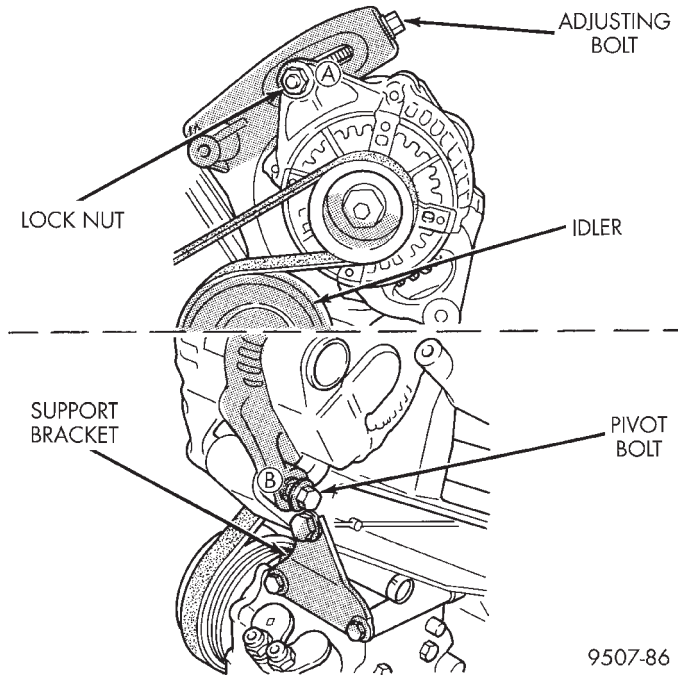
Air Conditioning Compressor and Generator Belt Adjustment
